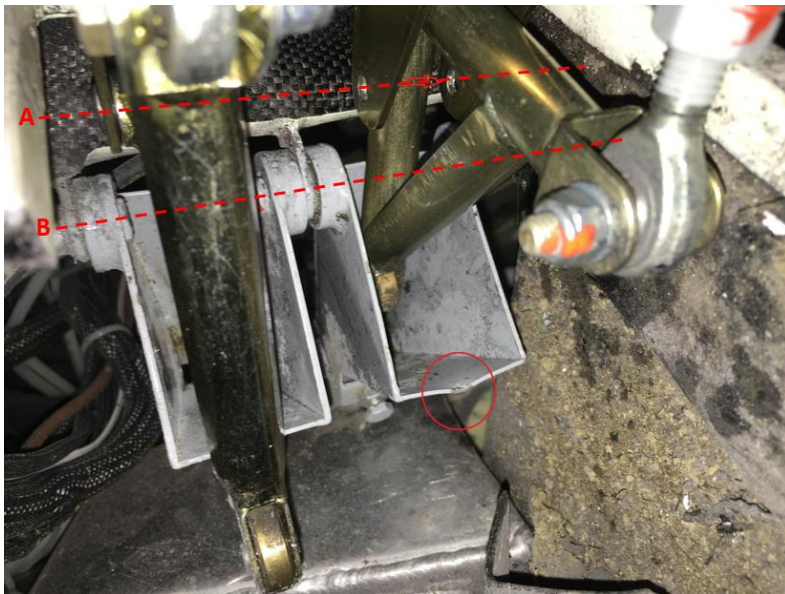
left wing airbrakes and flap *funnel* e *crankshaft* rotational axis misalignment.
